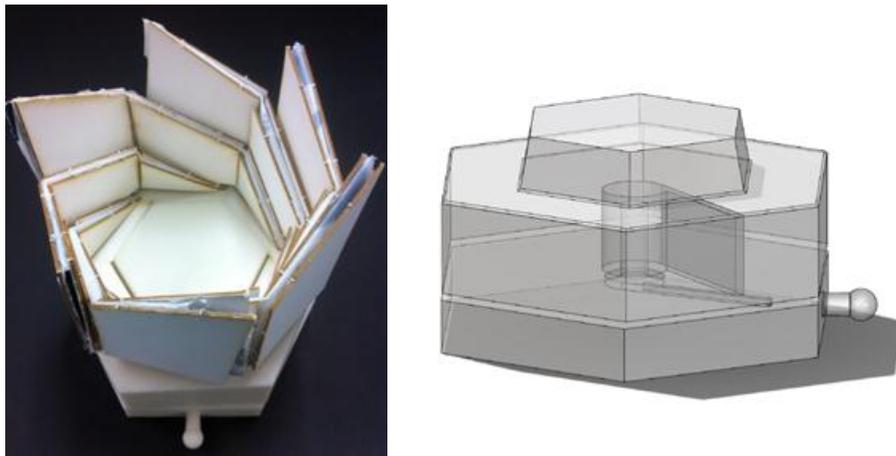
(left) Prototype of the torsion spring test base with array. (right) Translucent rendering of CAD model, showing the cavity for the torsion spring
